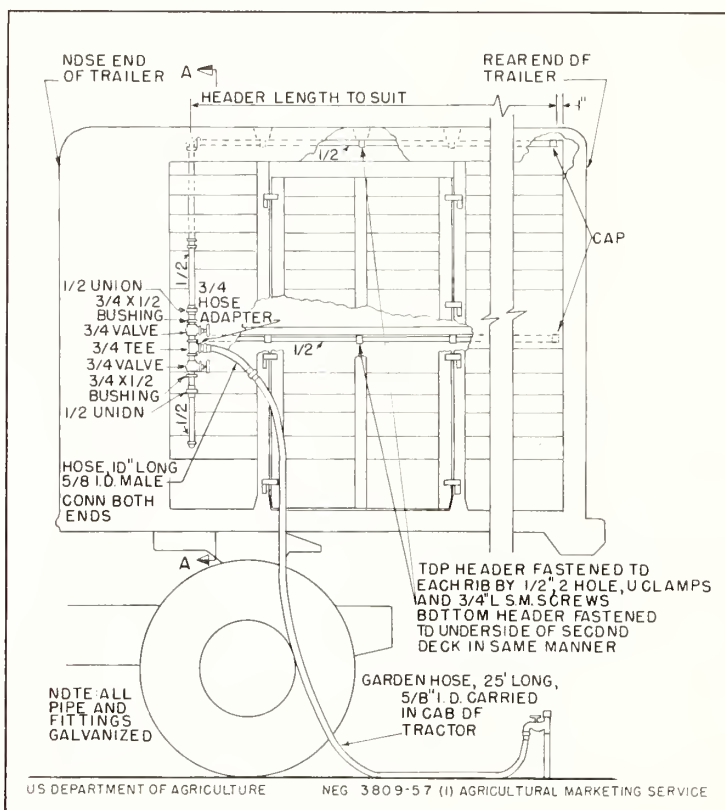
Details of piping in sprinkler system used on medium-haul tests (1956).
